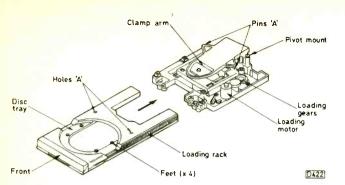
A common type of drawer/clamp arm assembly. Once the drawer has closed a spring forces the rear of the clamp arm upwards, pivoting the front downwards. As this occurs the two pins marked A drop through the holes marked A and the four rubber feet on which the disc rests are pressed down, allowing the disc to fall on to the turntable.
